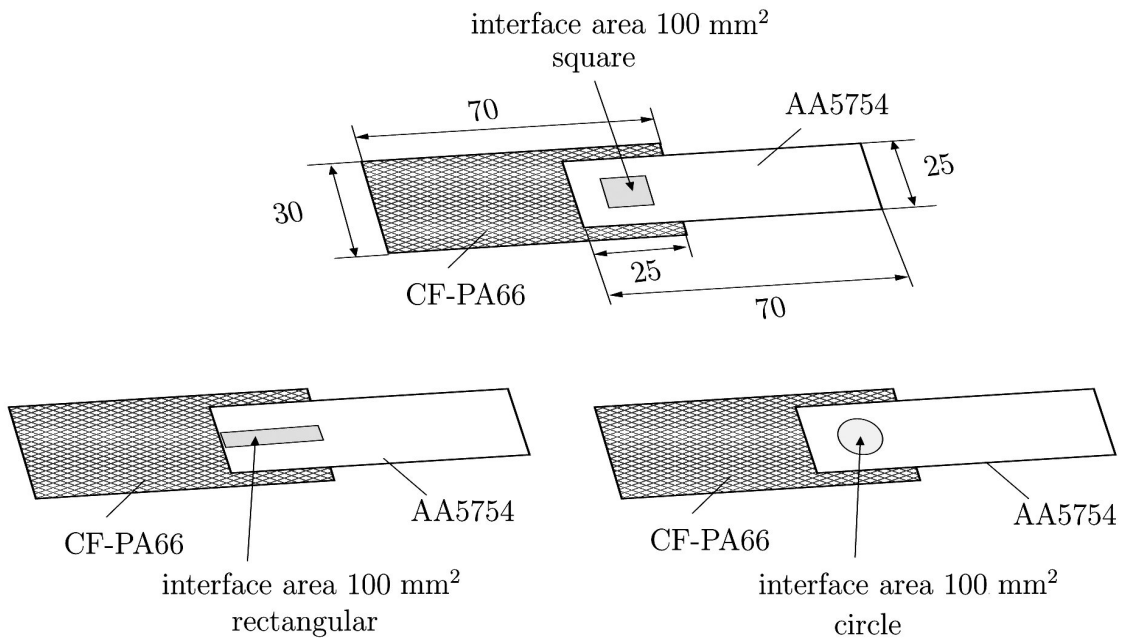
Geometry of adhesive AA5754/CF-PA66 joints
